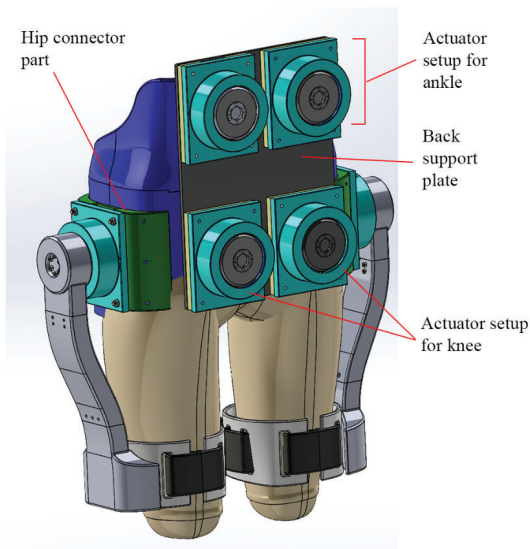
CAD model of the developed hip exoskeleton: Back Isometric View
